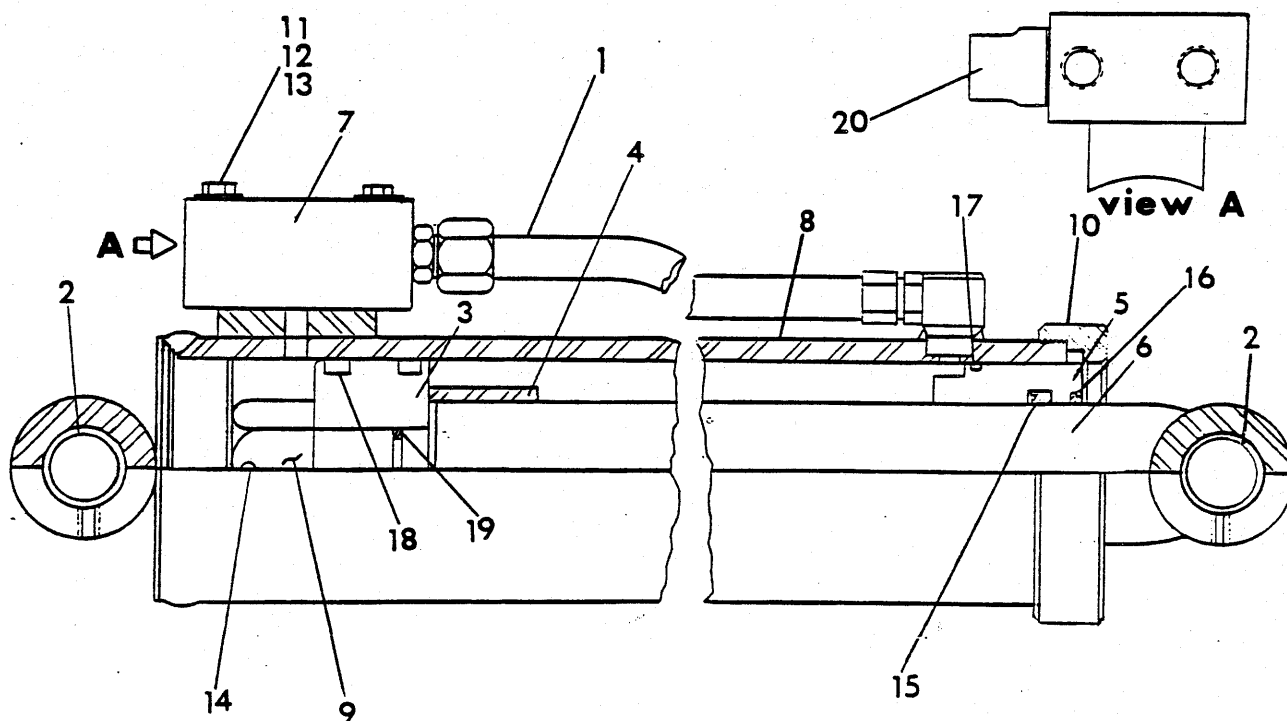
A TOPPING CYLINDER, PARTS BREAKDOWN
